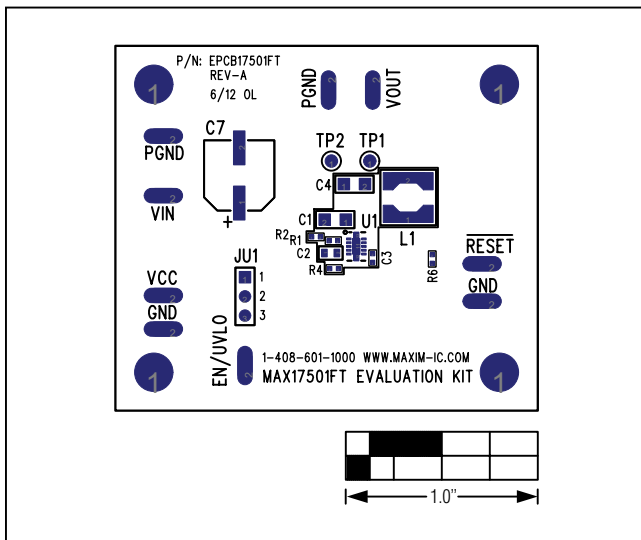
MAX17501F EV Kit Component Placement Guide—Component Side
